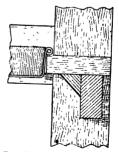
Detail of Drip Pan, etc., of Hall Stand (X X, Fig. 528).
